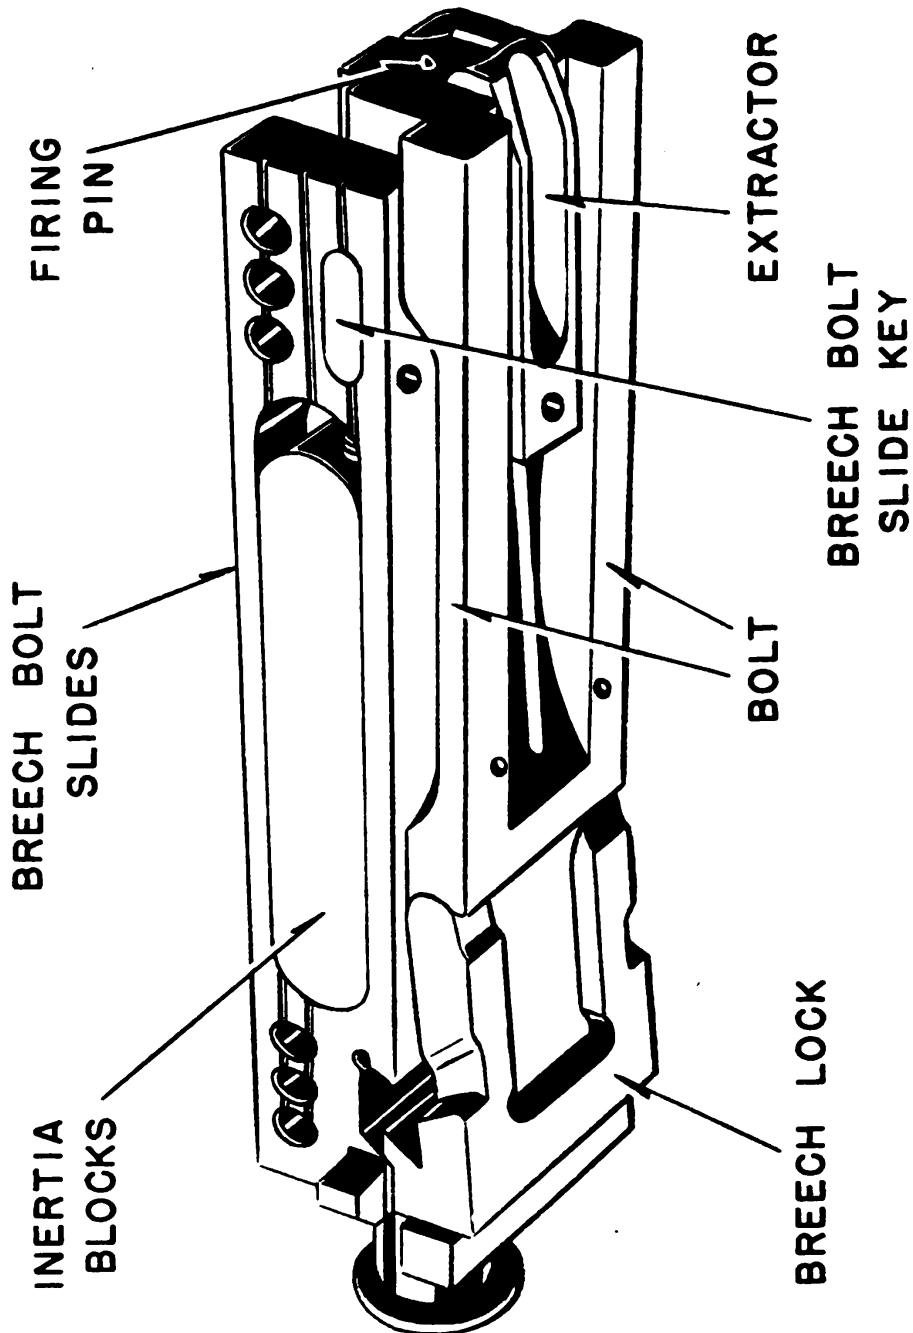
Breechblock assembly of the 20 mm. Aircraft automatic gun, AN-M2.
